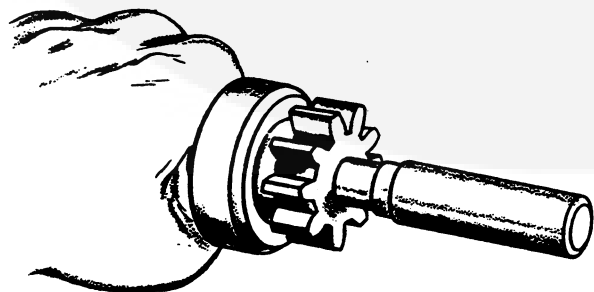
TOOL FOR DRIVING PINION STOPPER
